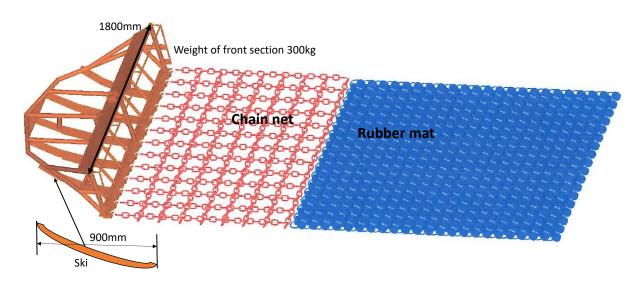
The dimensions of the *"Drag gear"*. Only the front part is used during trials. Total weight of the Drag gear is 700 kg.
